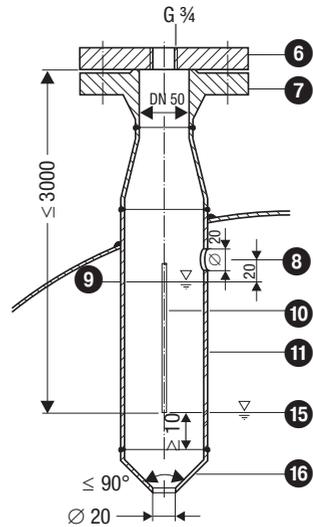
Protection tube (provided on site) for installation inside the boiler
